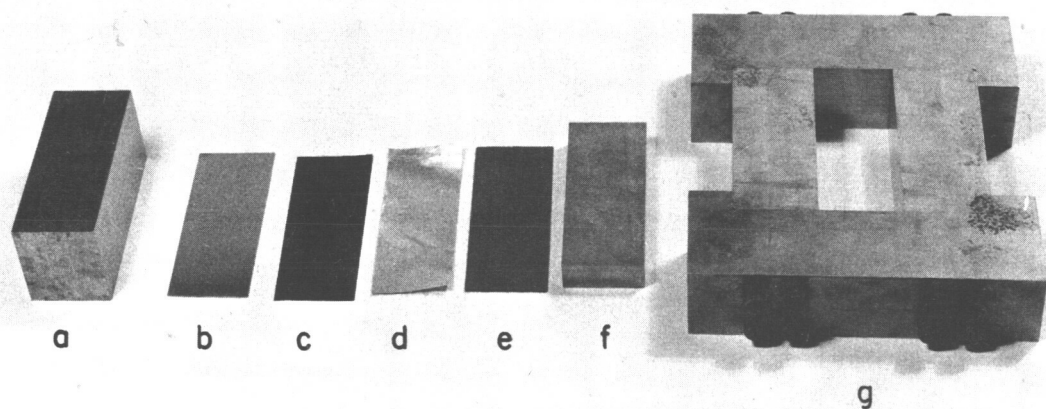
Die and load to produce grooved ferrite sheet by embossing.
